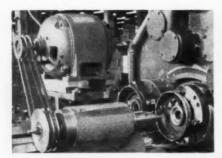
Special attachment of a precision boring spindle, motor driven, mounted on the end-working slide for precision boring the shaft hole of a motor end frame.
